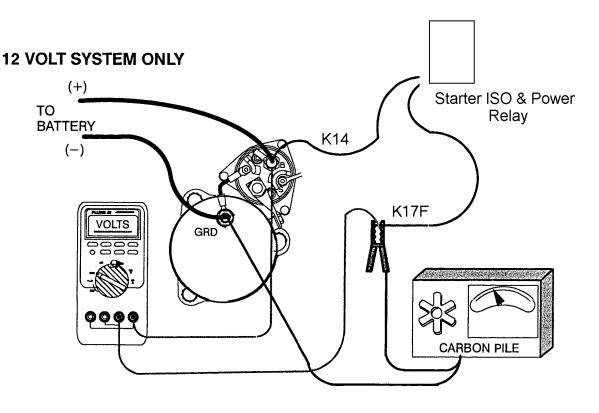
Cranking Motor Solenoid Circuit Test — Part 1
